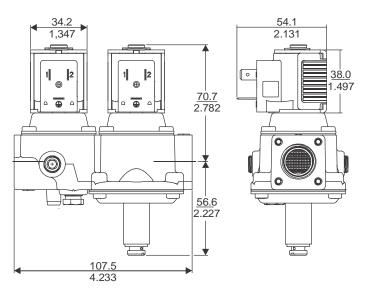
Bottom Adjust Regulator Dimensions, mm (in.)
